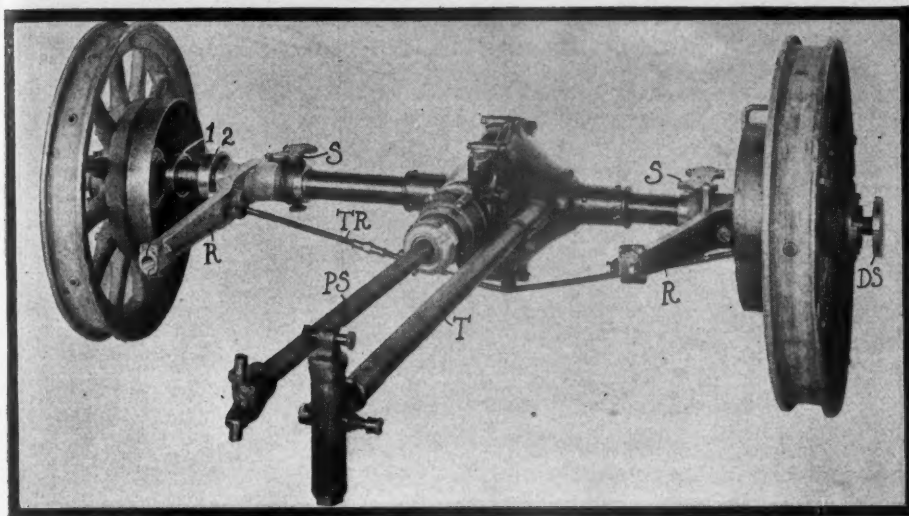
DETAILS OF LOCOMOBILE REAR AXLE SYSTEM
